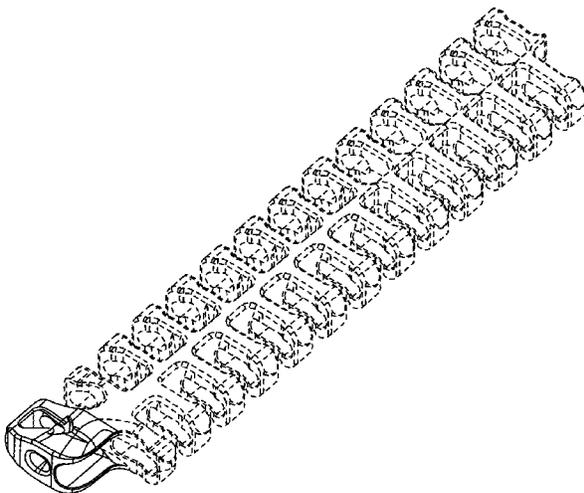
is a second side enlarged view of the conveyor belt module of FIG. 1.
